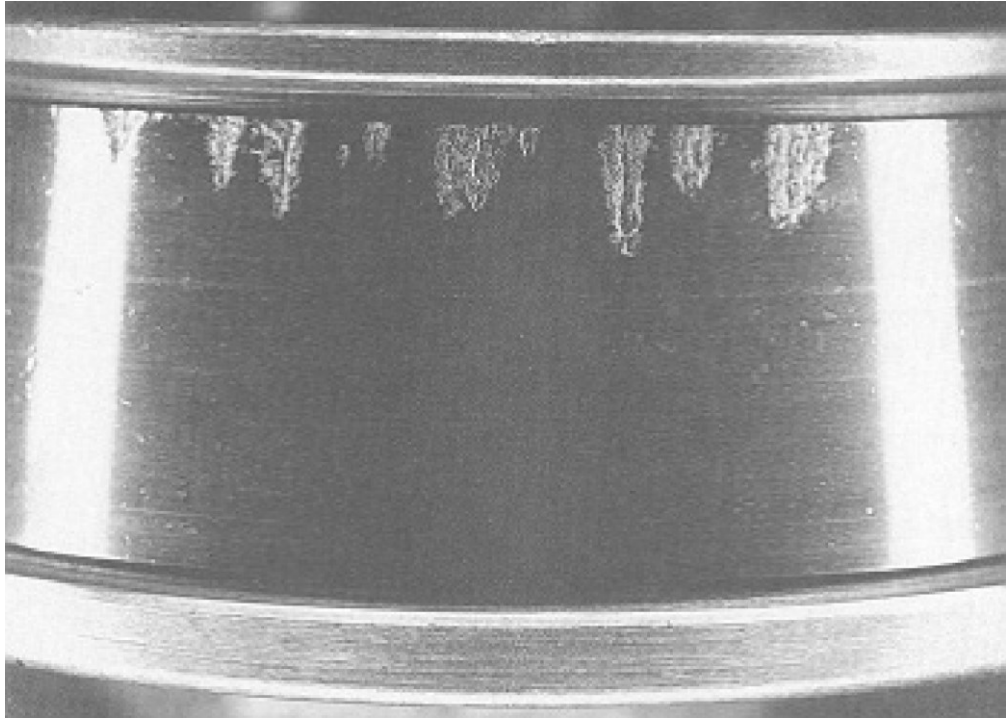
Subsurface initiated spalling due to edge loading in a tapered roller bearing raceway [30].
